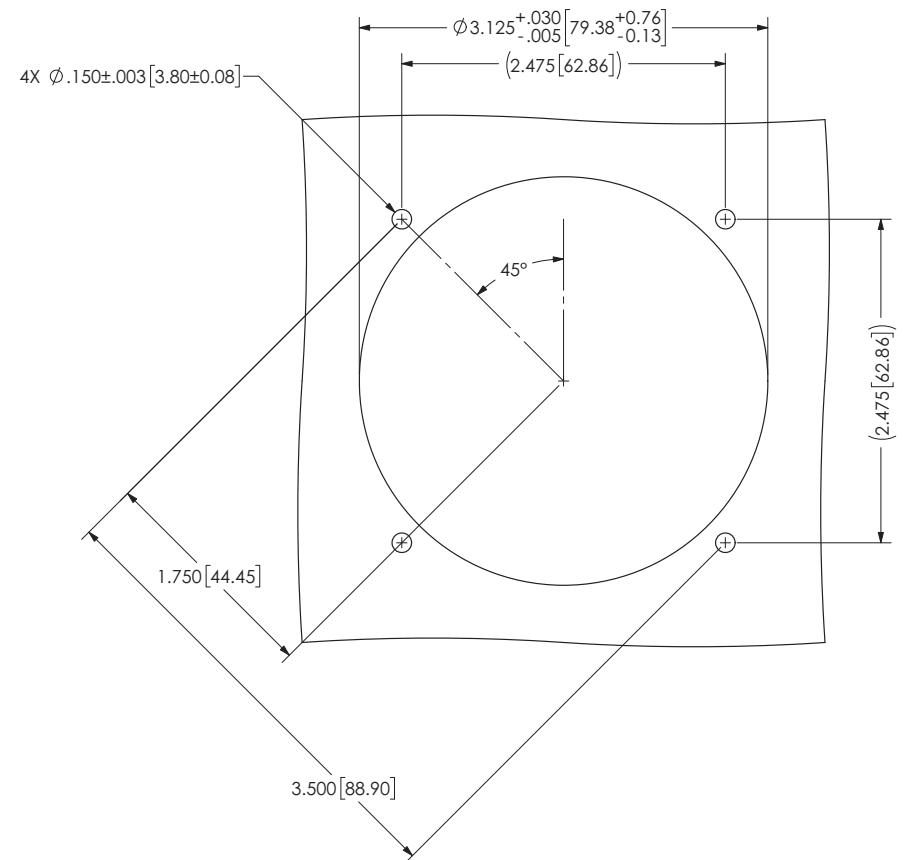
GSB 15 Assembly Drawing (011-05043-00 and -01 Mounting Kits)
